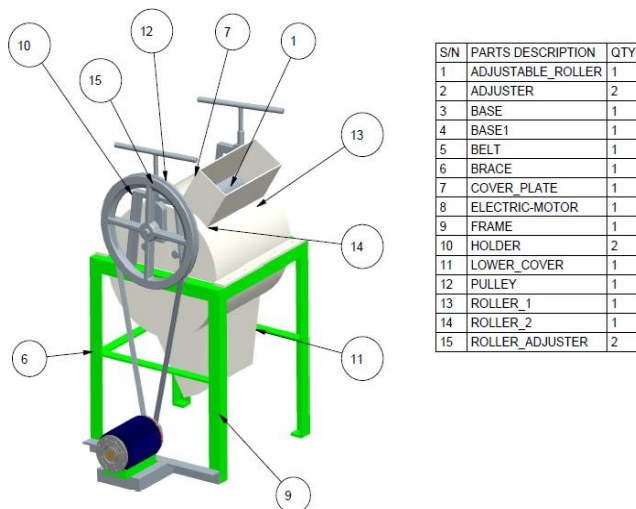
Assembly Drawing of Sugar cane juice Extractor
